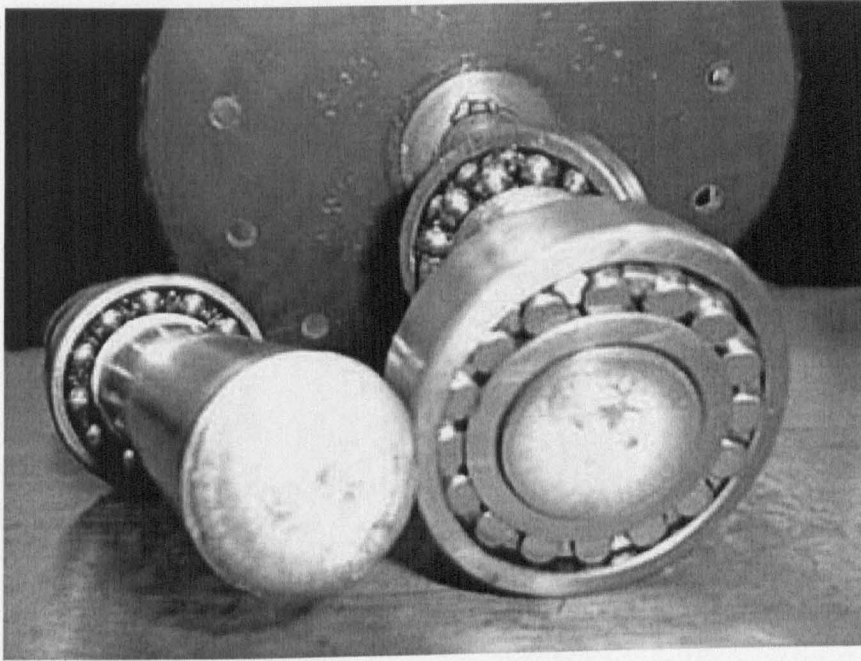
Ceased bearing and broken shaft due to fatigue failure
